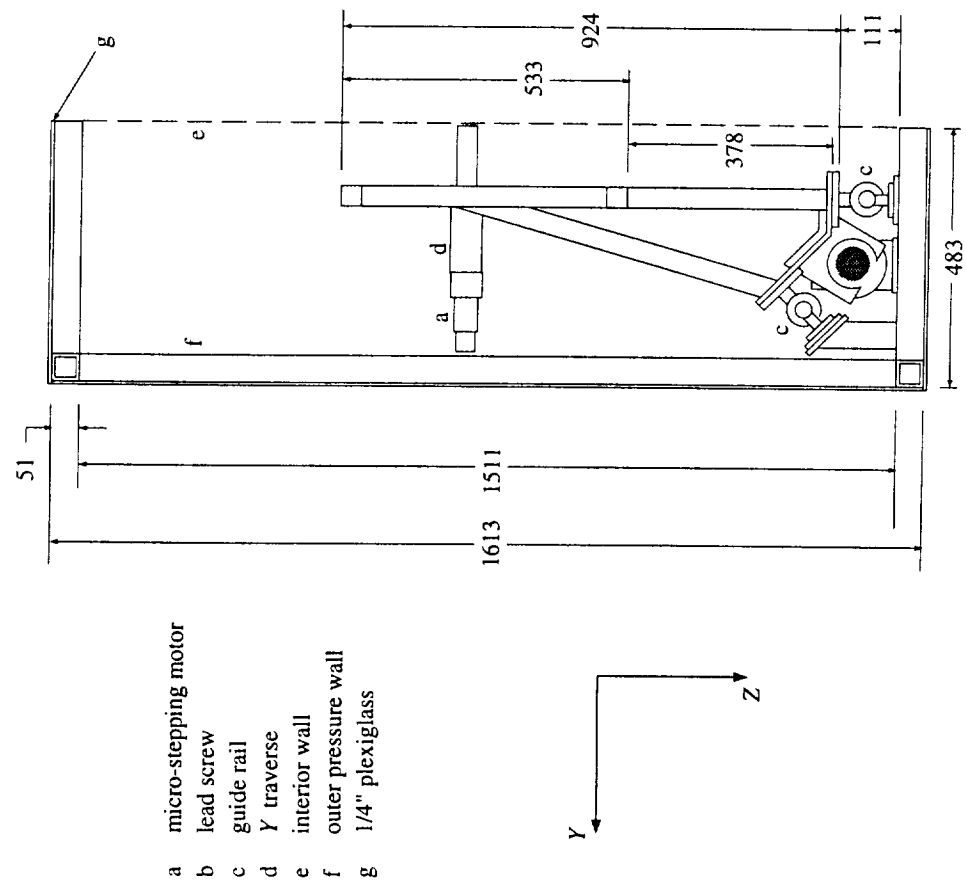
Front view of traverse carriage. All dimensions are in millimeters.
